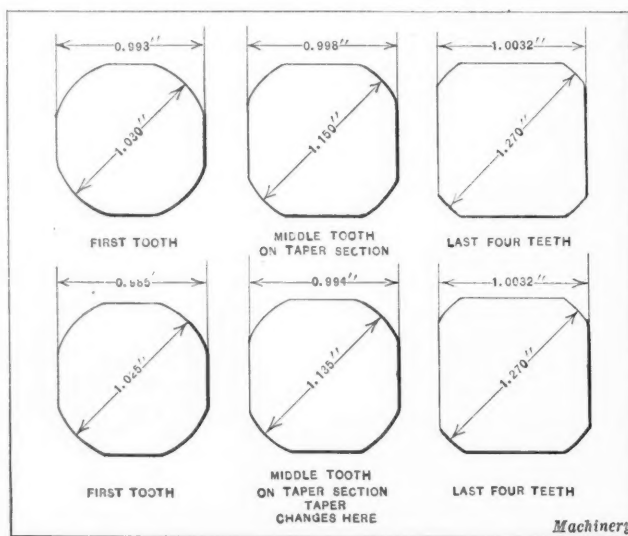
Tooth Dimensions of 1-inch S. A. E. Broach before and after Grinding
